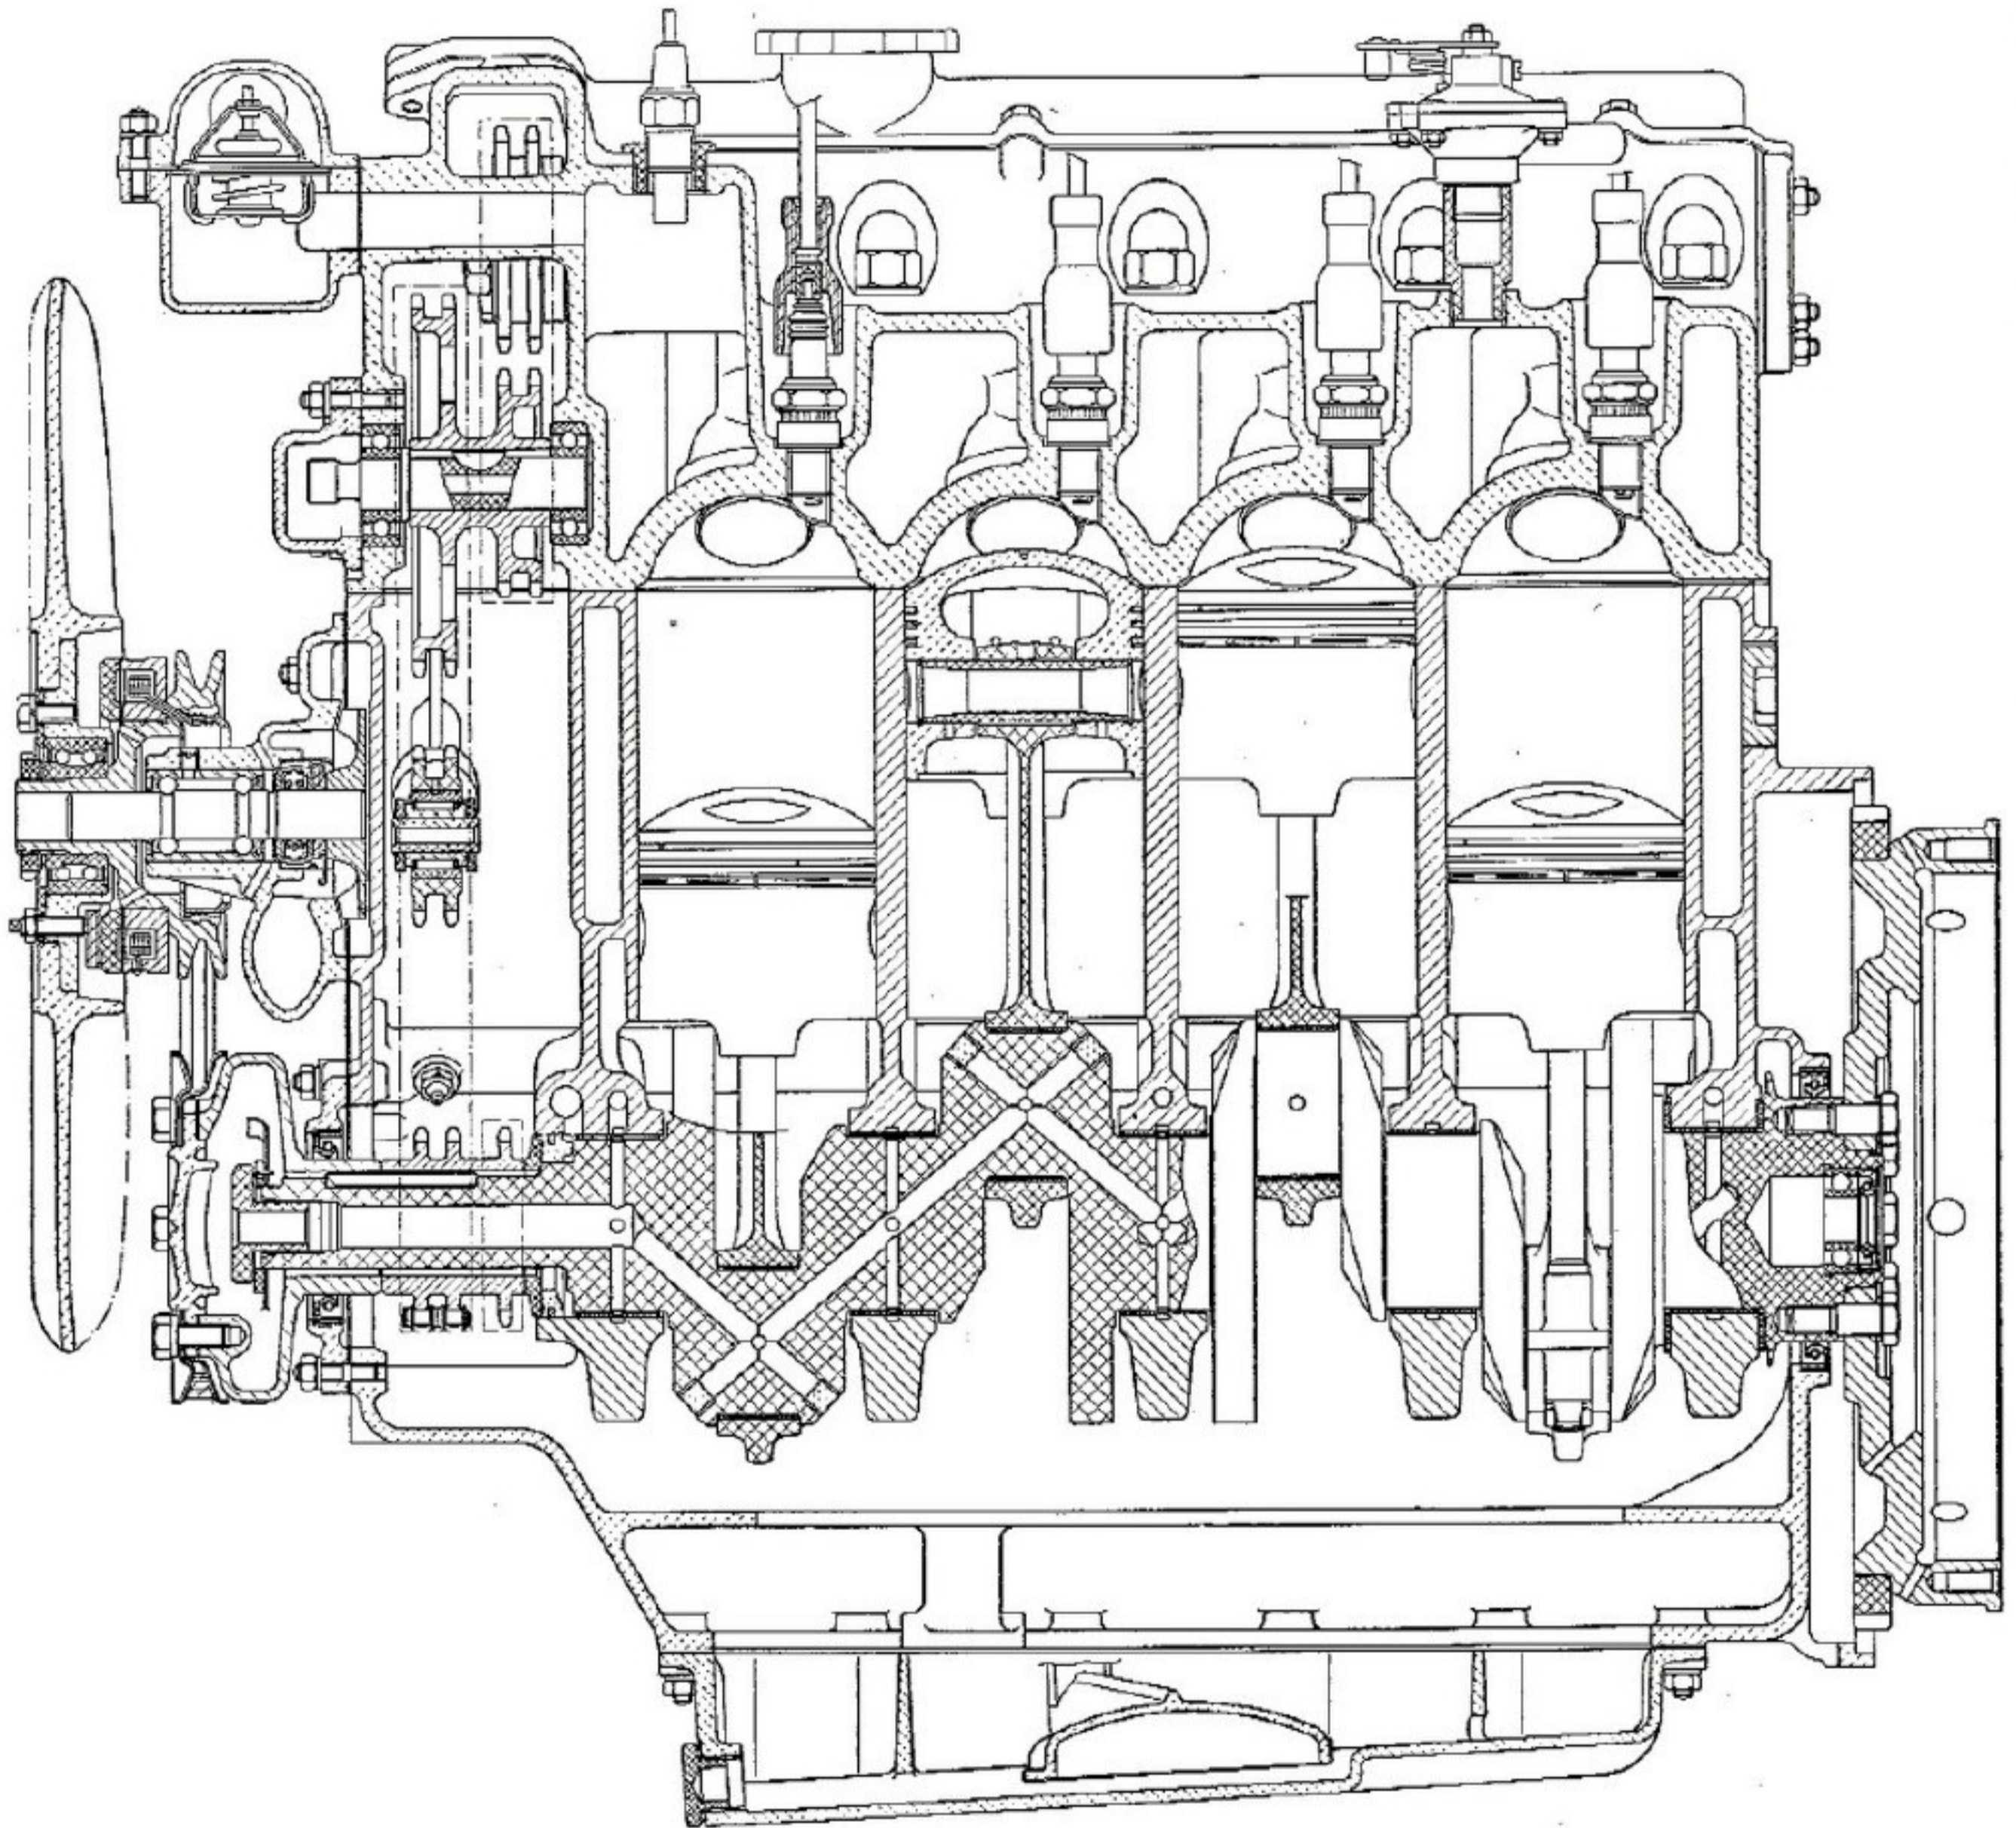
Type 118 A.000 engine - Longitudinal section on crankshaft, pistons, fan-water pump, and spark plugs.
